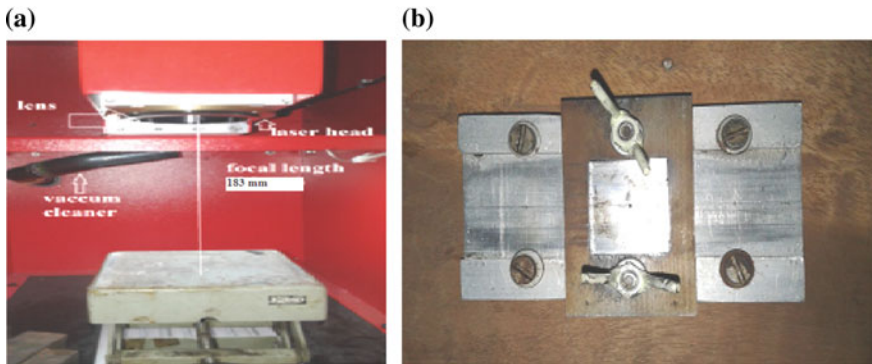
a Laser welding setup and b mechanical setup
